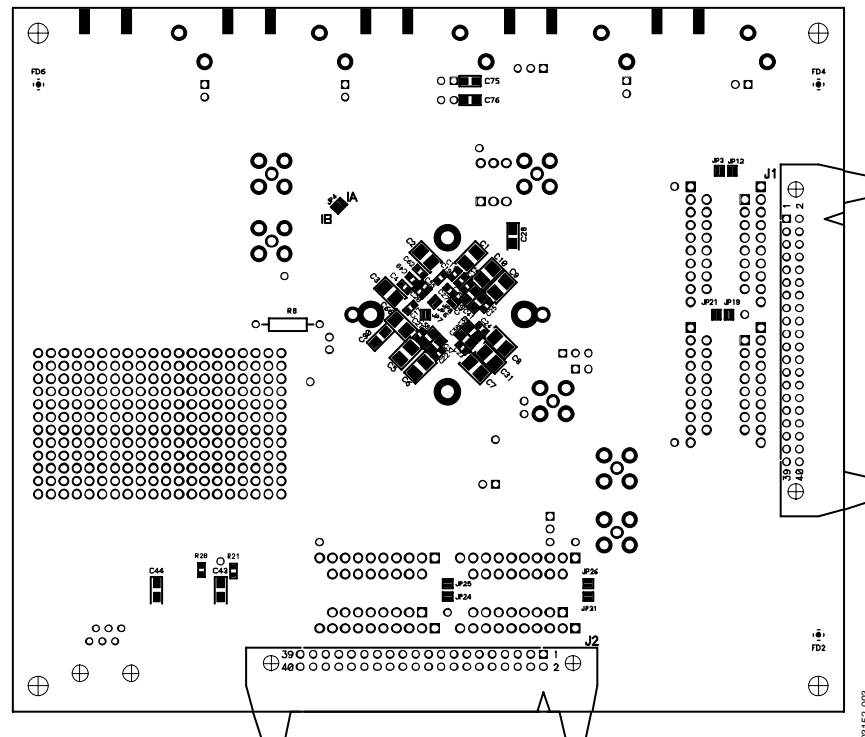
PCB Assembly, Secondary Side, Rev. F Evaluation Board
